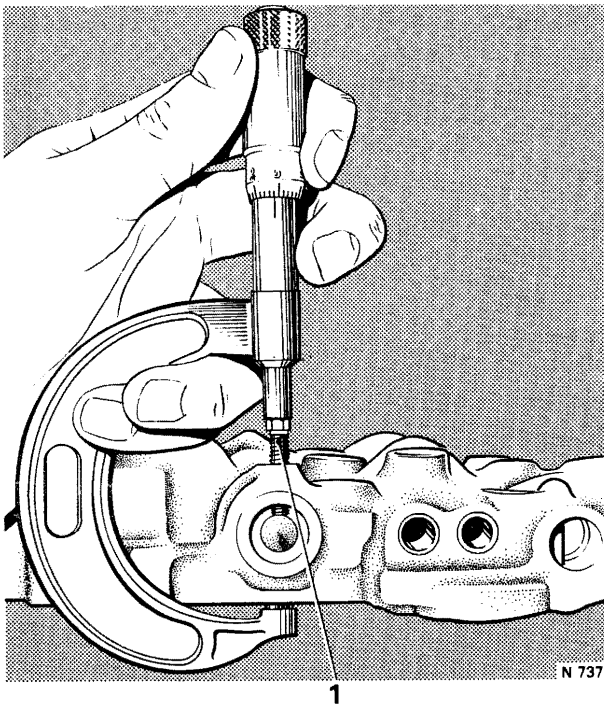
MEASURING THE ADJUSTING SCREW (EARLY CARS)
